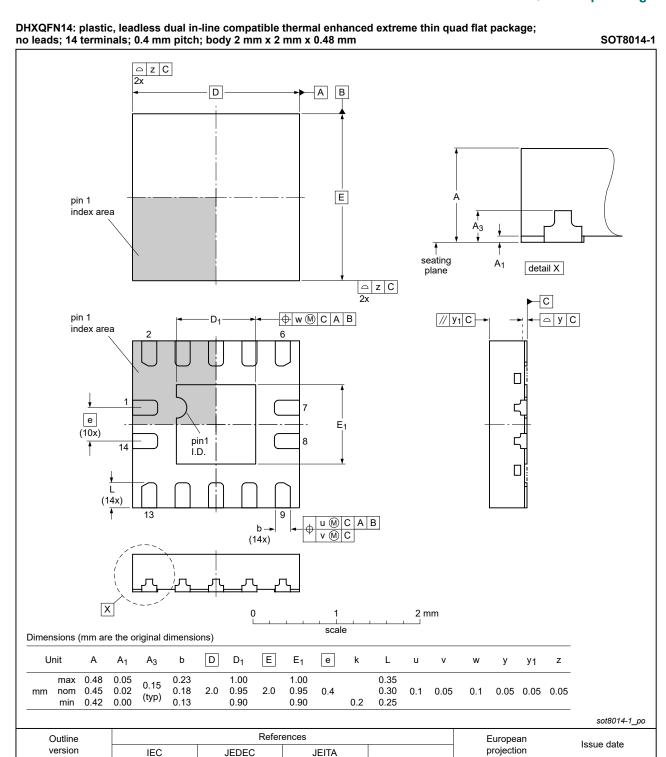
Package outline SOT8014-1 (DHXQFN14)
